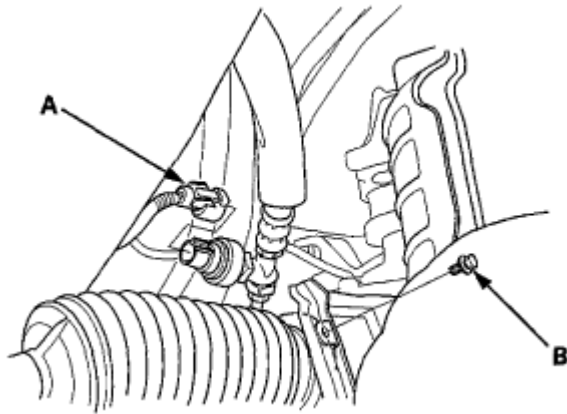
Identifying PSP Switch Connector And Heat Shield Bolt
